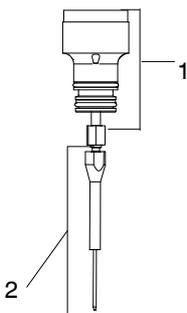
Piston/Cartridge Assembly and Needle Assembly
